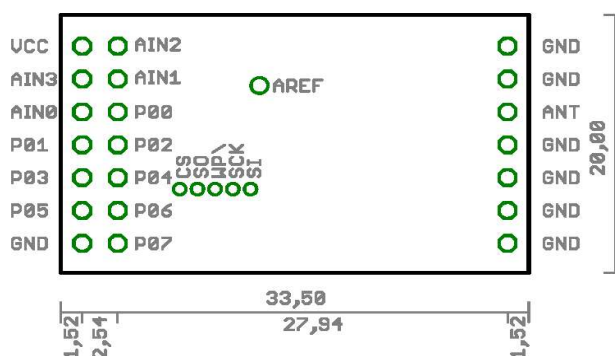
TLX9E5 (top view). All dimensions are in millimeters
